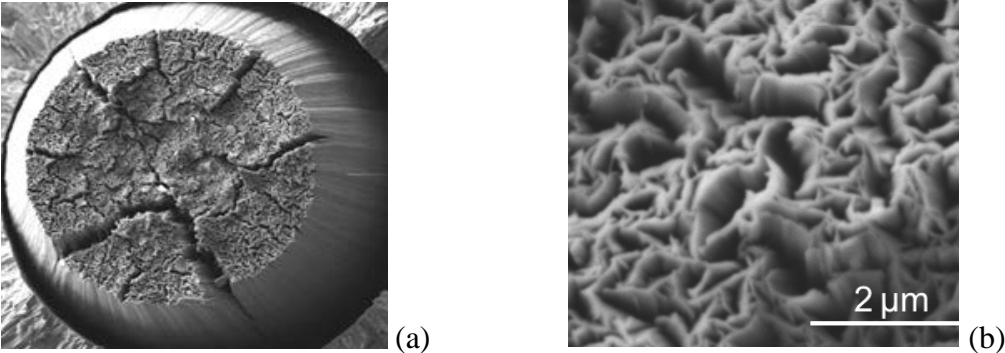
Fractographic images of the rupture surface of a commercial tungsten wire (diameter: 125 μm) after a tensile test. (a): whole ruptured cross section, (b): microscopic image of the fracture surface.
